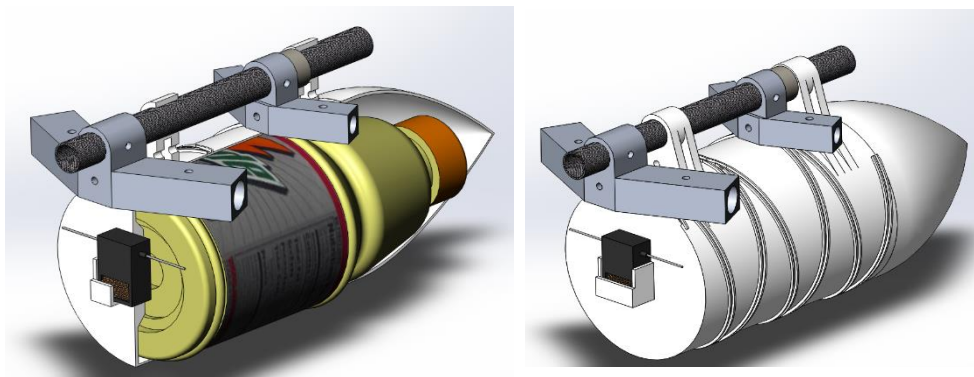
Section View and Entire View of 3D Printed Payload Case
